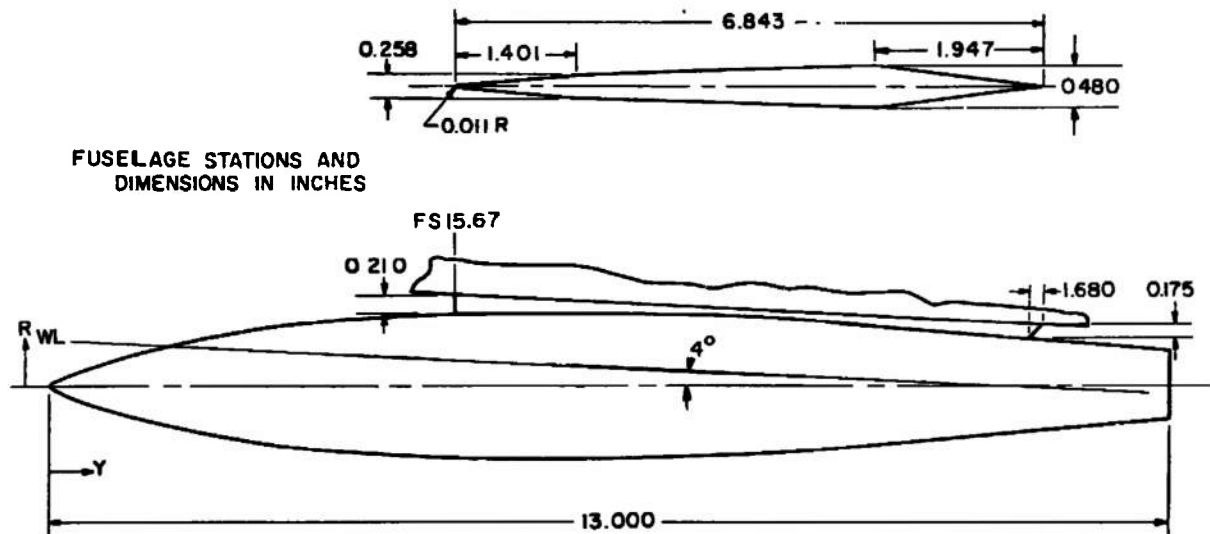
Details and Dimensions of the 600-gal Dummy Fuel Tank
